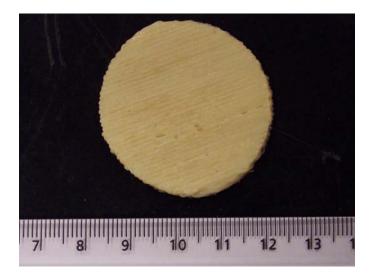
10: One of the produced parts –This part was produced with Design-A deposition system (4 layers)
